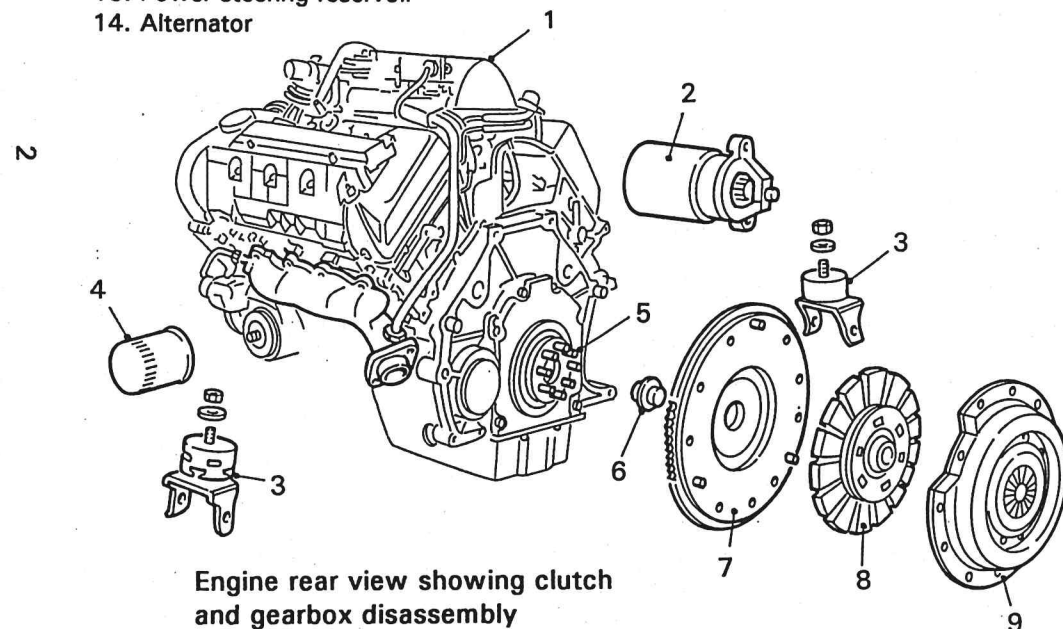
Stripping Delivered Engine Ready For Fitting New Parts
